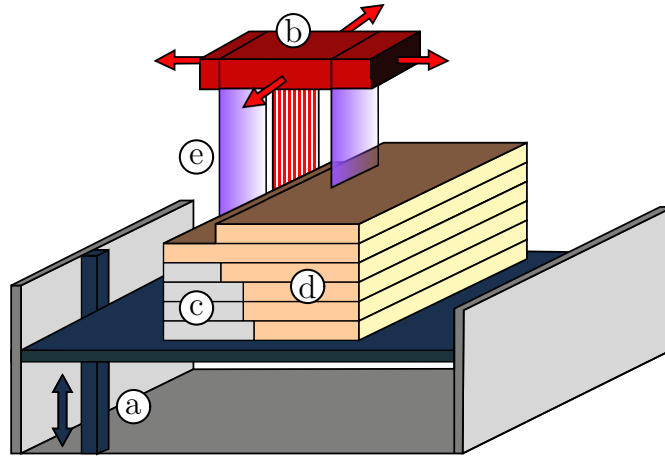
Material jetting machine PolyJet consisting of (a) vertically movable base platform, (b) multi-nozzle inkjet head, (c) layers of support material, (d) layers of model material, and (e) UV light source attached to inkjet head [22].
